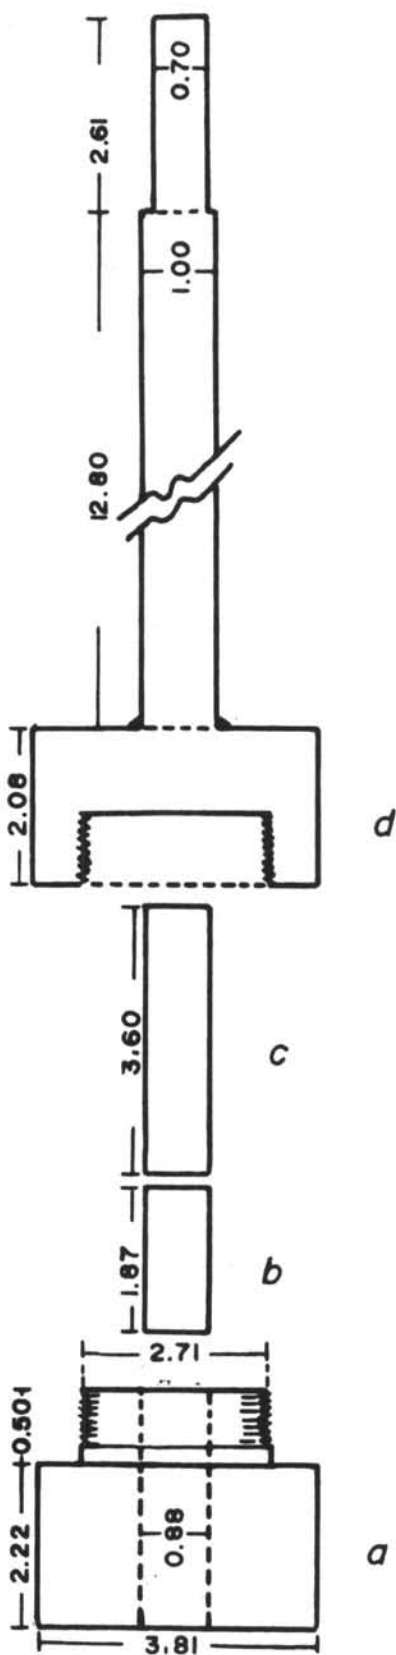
The schematic drawing and dimension in cm of compression die assembly.
